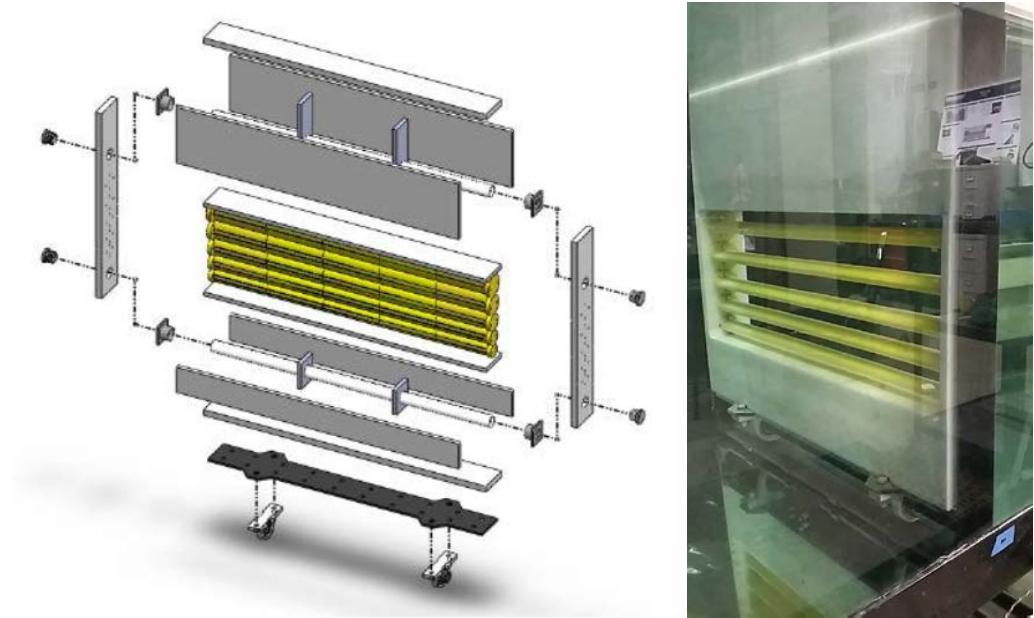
The OSWEC model exploded in assembly view (left) and the device installed in the wave tank (right).
